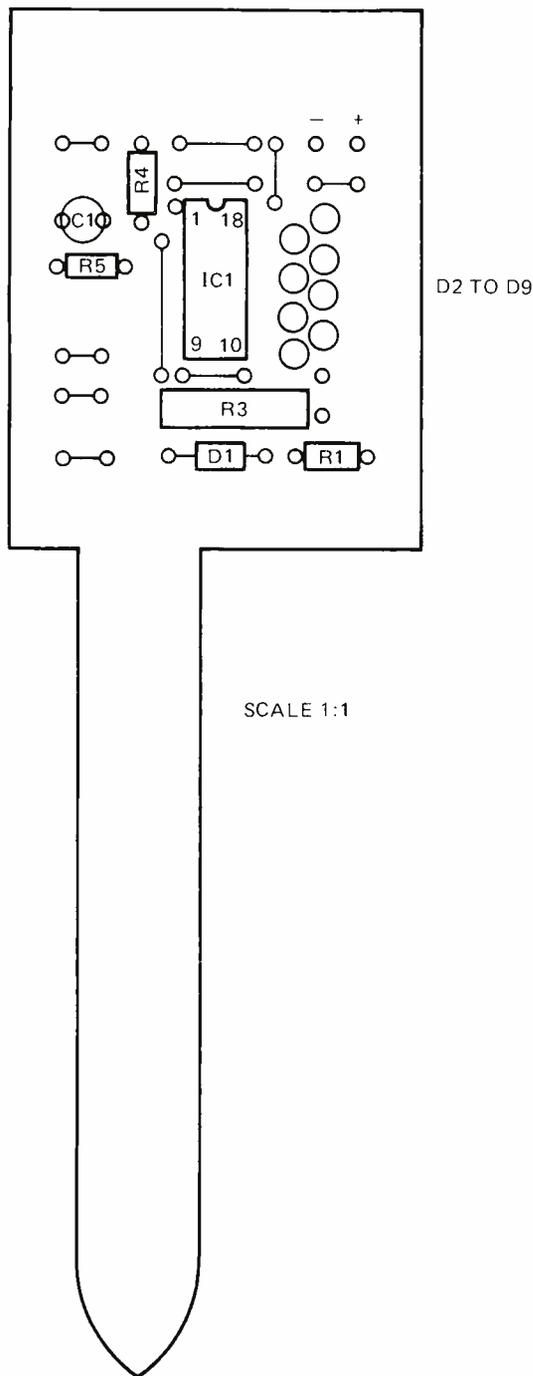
HERE'S A ROUGH LAYOUT of the Plant Moisture Guide. Parts can be hard wired to a perf board since parts and wire placement are not critical at all. Long sensor probe is a double-sided copper-clad board cut to scale.
